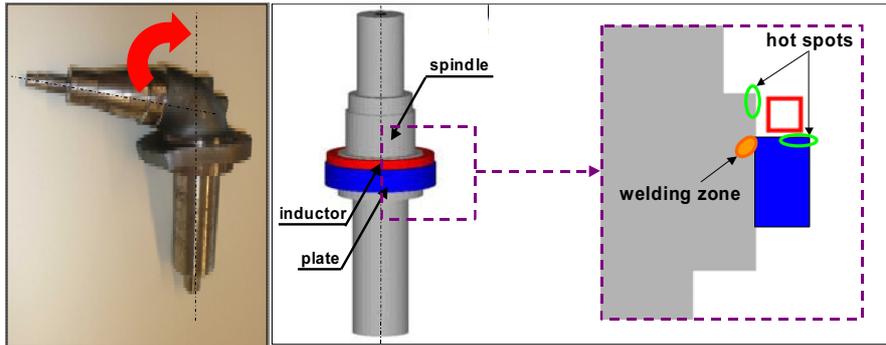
Welded parts (produced by CNH Belgium N.V.) and schematic sketch of investigated welding arrangement
